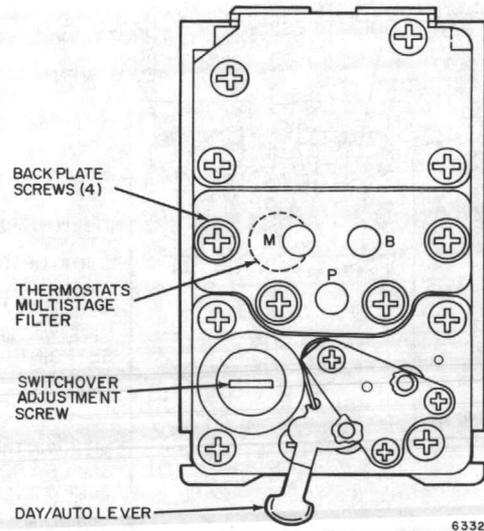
Back View of Thermostat Showing Switchover Mechanism.
